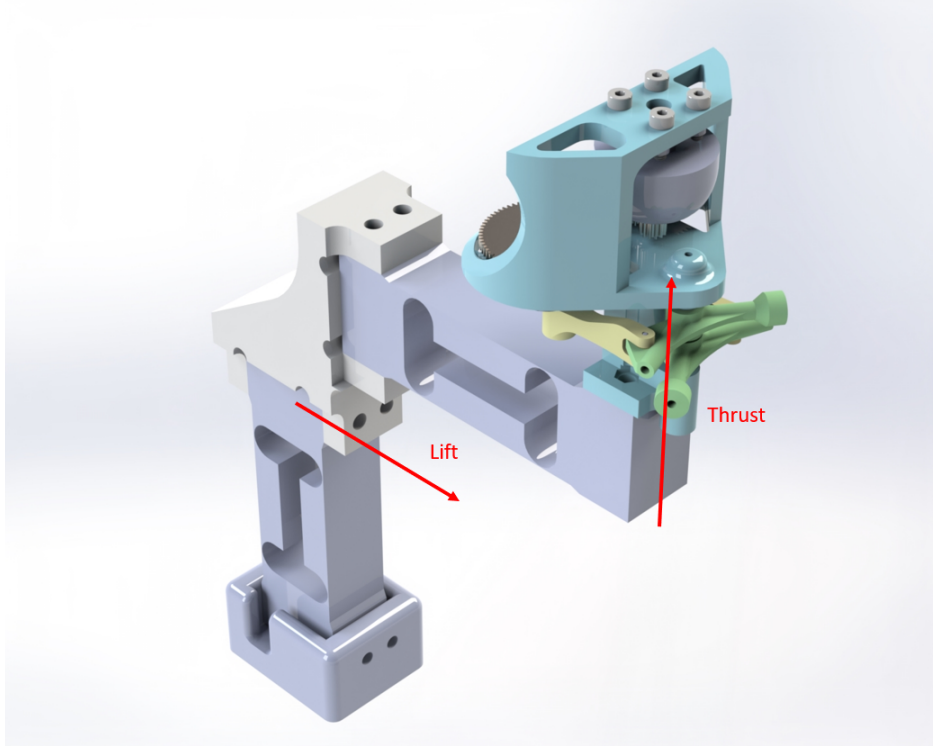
Closer View of the Load Cell Apparatus w/ Beta Mechanism
